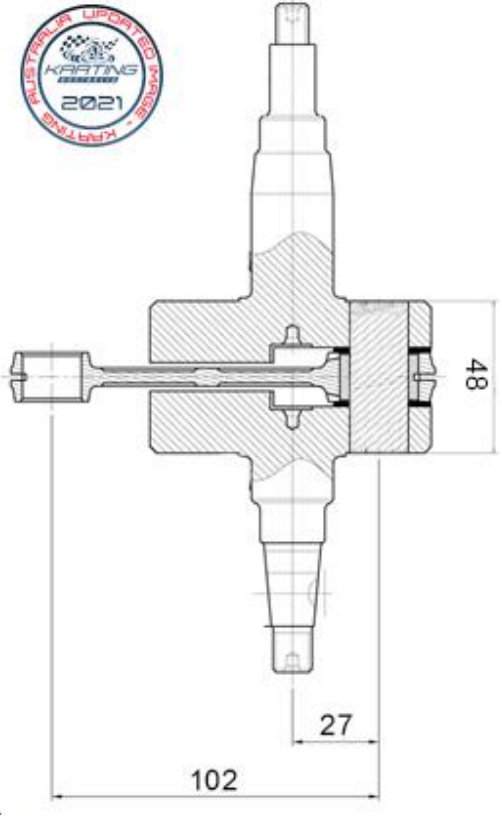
PHOTO OF THE CRANKSHAFT & CONROD	PHOTO OF THE CRANKSHAFT & CONROD
